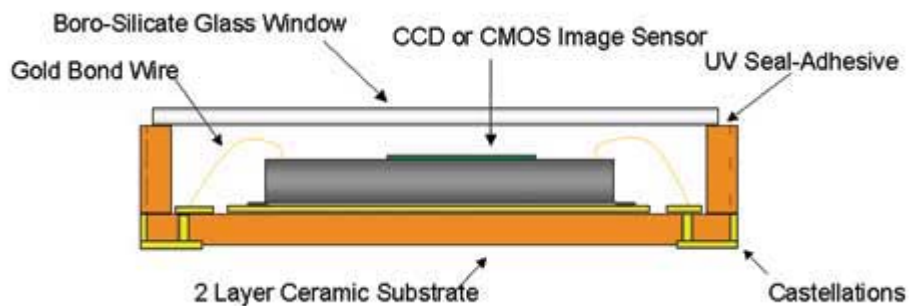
Cross section of a moulded cavity package (courtesy Eurasem BV)
